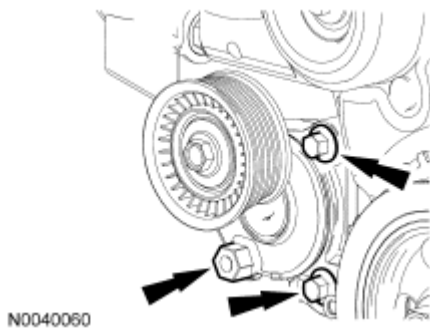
Locating Accessory Drive Belt Tensioner Bolts
